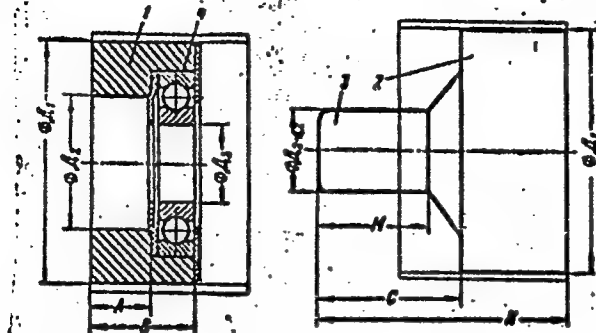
Device for friction welding of thin-wall pipes.
